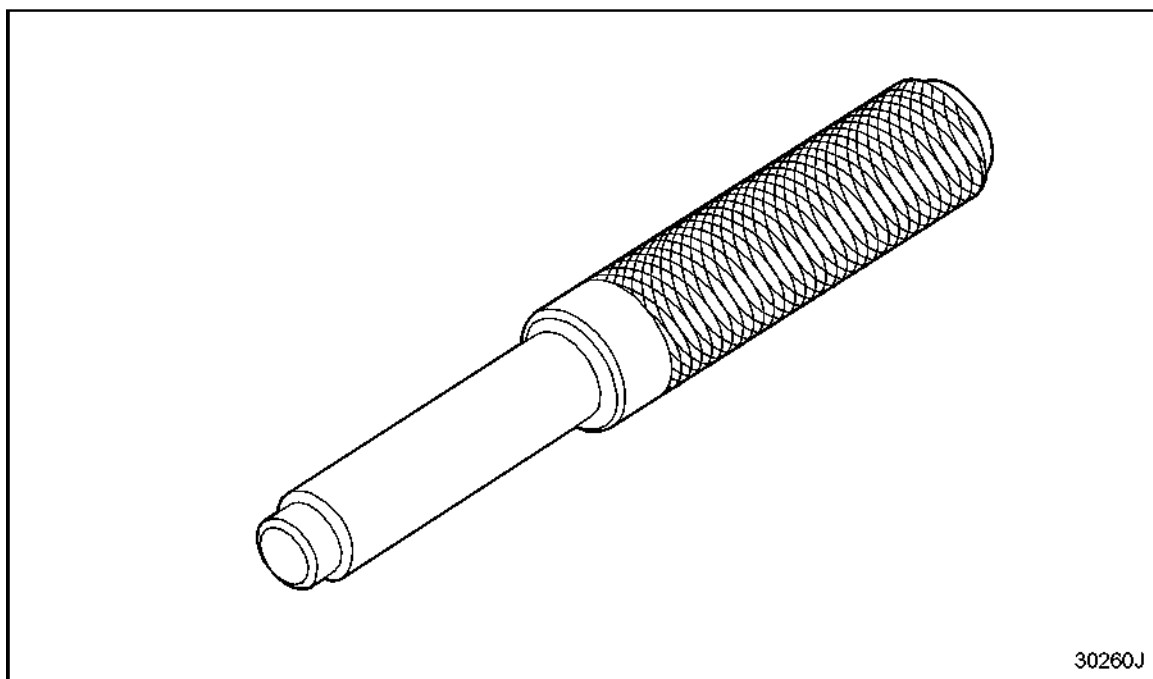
Cup Plug Installer (requires J 7079-2) ,J 41746
